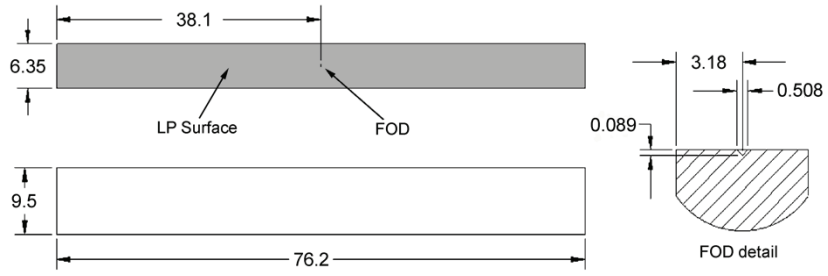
Fatigue coupon and simulated damage, dimensions in mm
